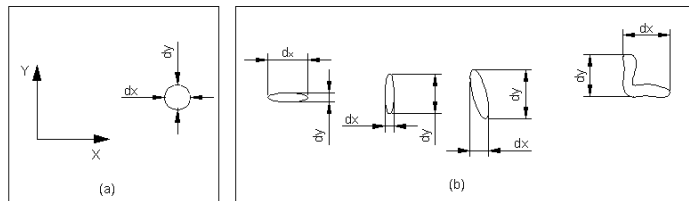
(a) Direction of the axes, shape and dimensions of the original circle before the extrusion, (b) dimensions and format of the circles after extrusion.
